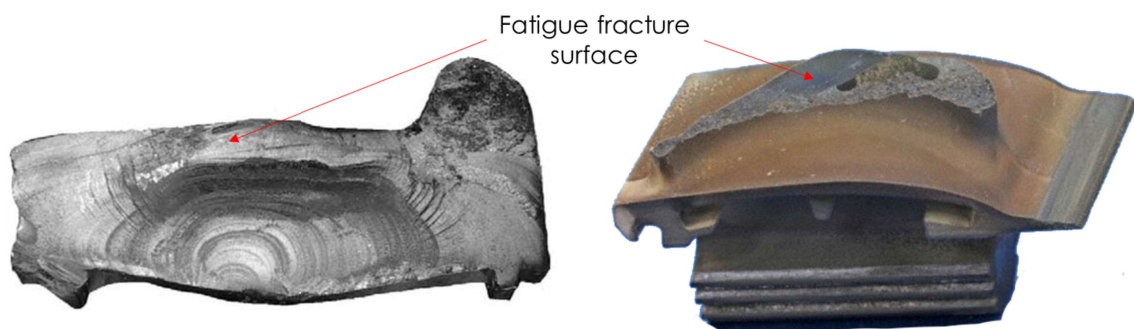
Left – Fatigue fracture surface of: Left – A broken train wheel [04E]; Right – The root of a fractured engine blade of Boeing 747-400 [12H].
